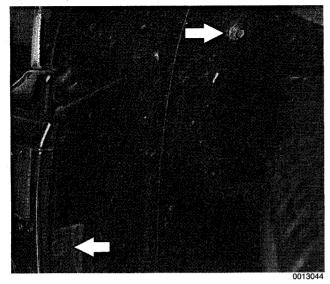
Bumper cover retaining screws (arrows) in left wheel well.
